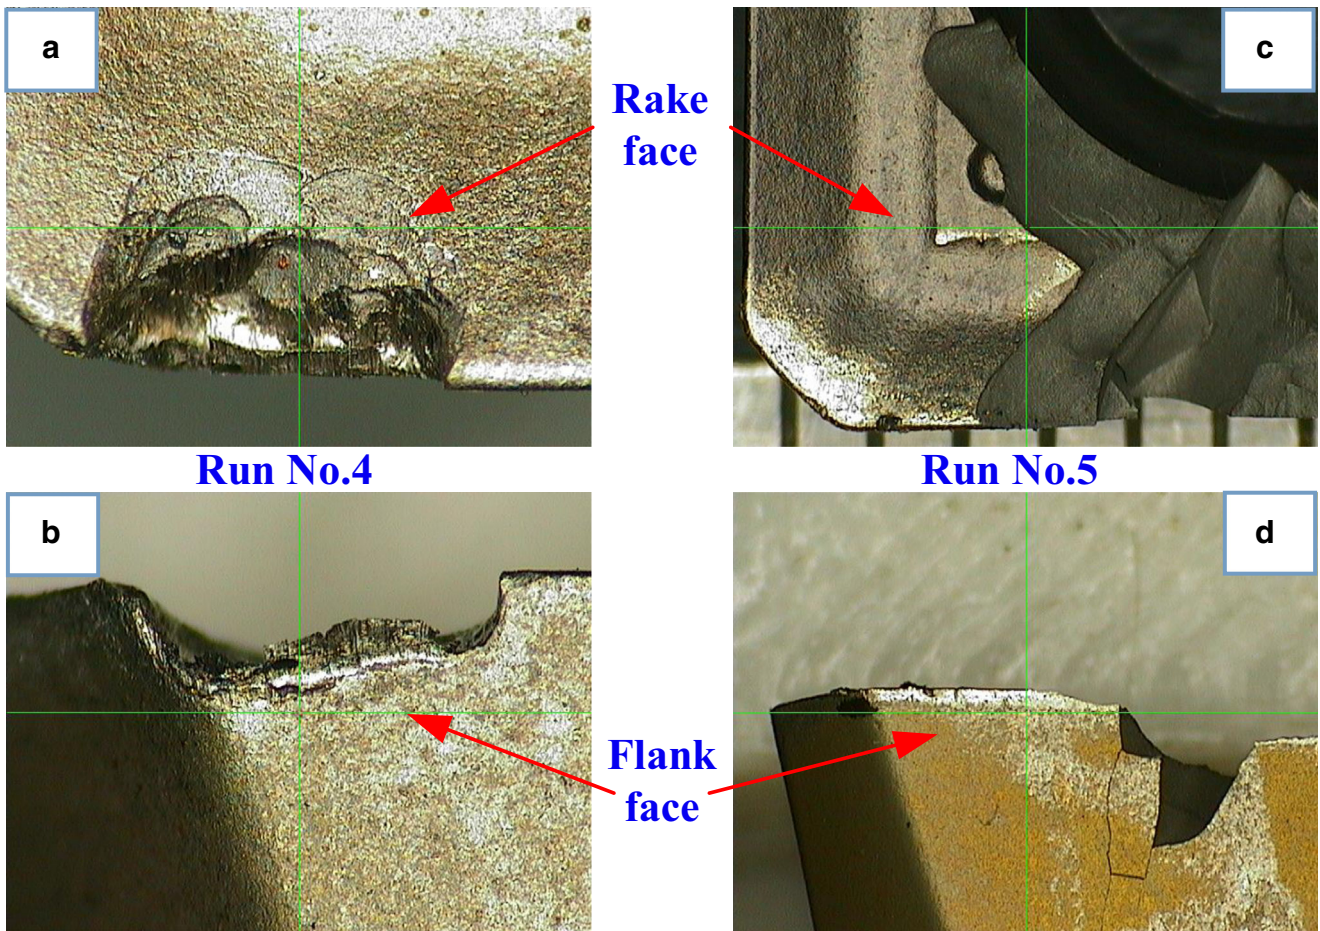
Brittleness breakage of tool A: a rake face and b flank face after run no. 4; c rake face and d flank face after run no. 5
